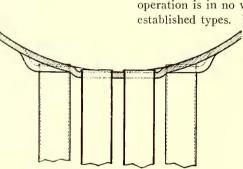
RUST CONSTRUCTION FOR WATER-TUBE BOILERS, EMBRACING THE USE OF CYLINDRICAL DRUMS WITHOUT FLAT SURFACES OR BENT TUBES
